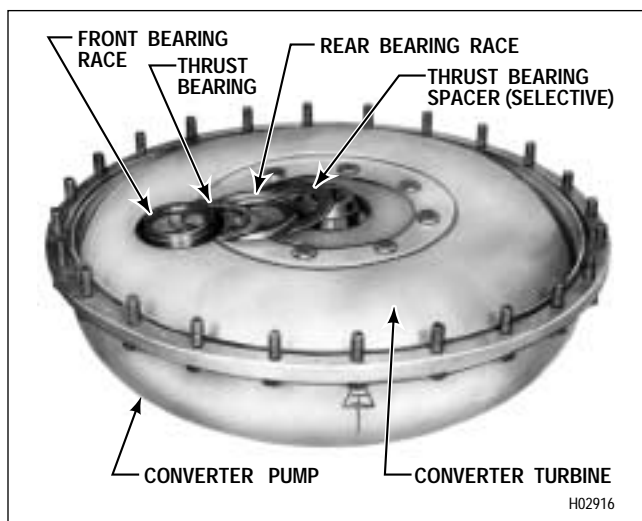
Removing (or Installing) Spacer, Bearing, and Races at Front of Torque Converter Turbine (AT 543)
